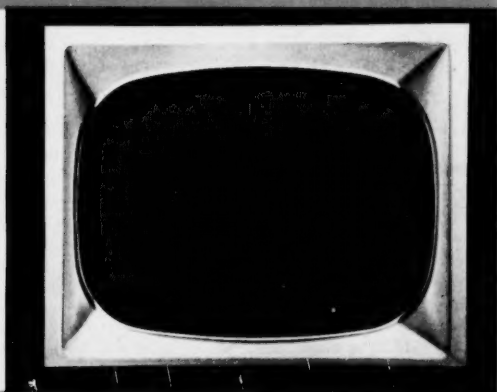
Finished styrene copolymer mask for 21-in. television. Sheet is trimmed after forming; mask is spray painted
